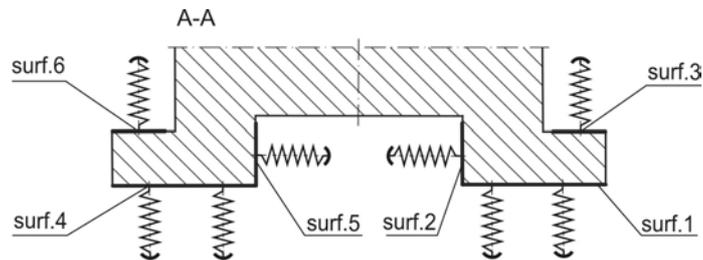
Discretization of the contact surfaces in the knee-column system of the milling machine
